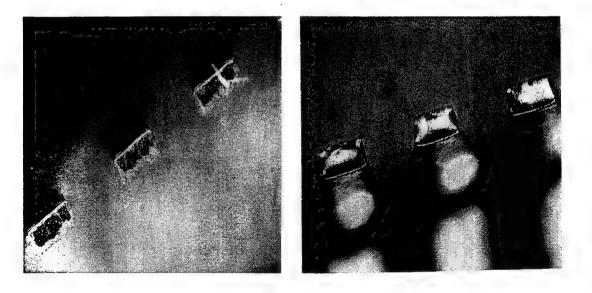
Two toe-end cases: typical "dip-and-look" failure, probably non-solderable at assembly; and typical "good" tinned toe-end
